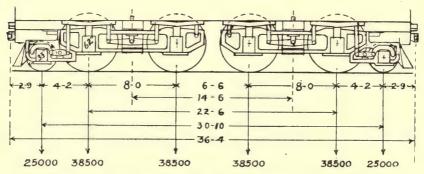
New York, New Haven and Hartford Railroad Locomotive, 1909. Forty-one used on New York Division in passenger service. 102-tons, 960-h. p., 1-phase, 11,000-220-volt motors. Gearless, quill-mounted type.
